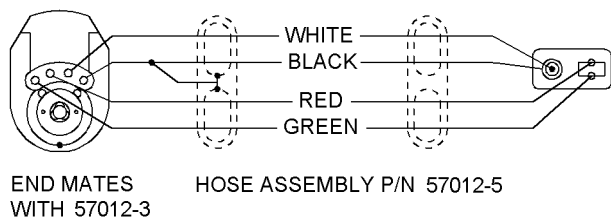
Oxygen Regulator Hose Wiring Diagram
